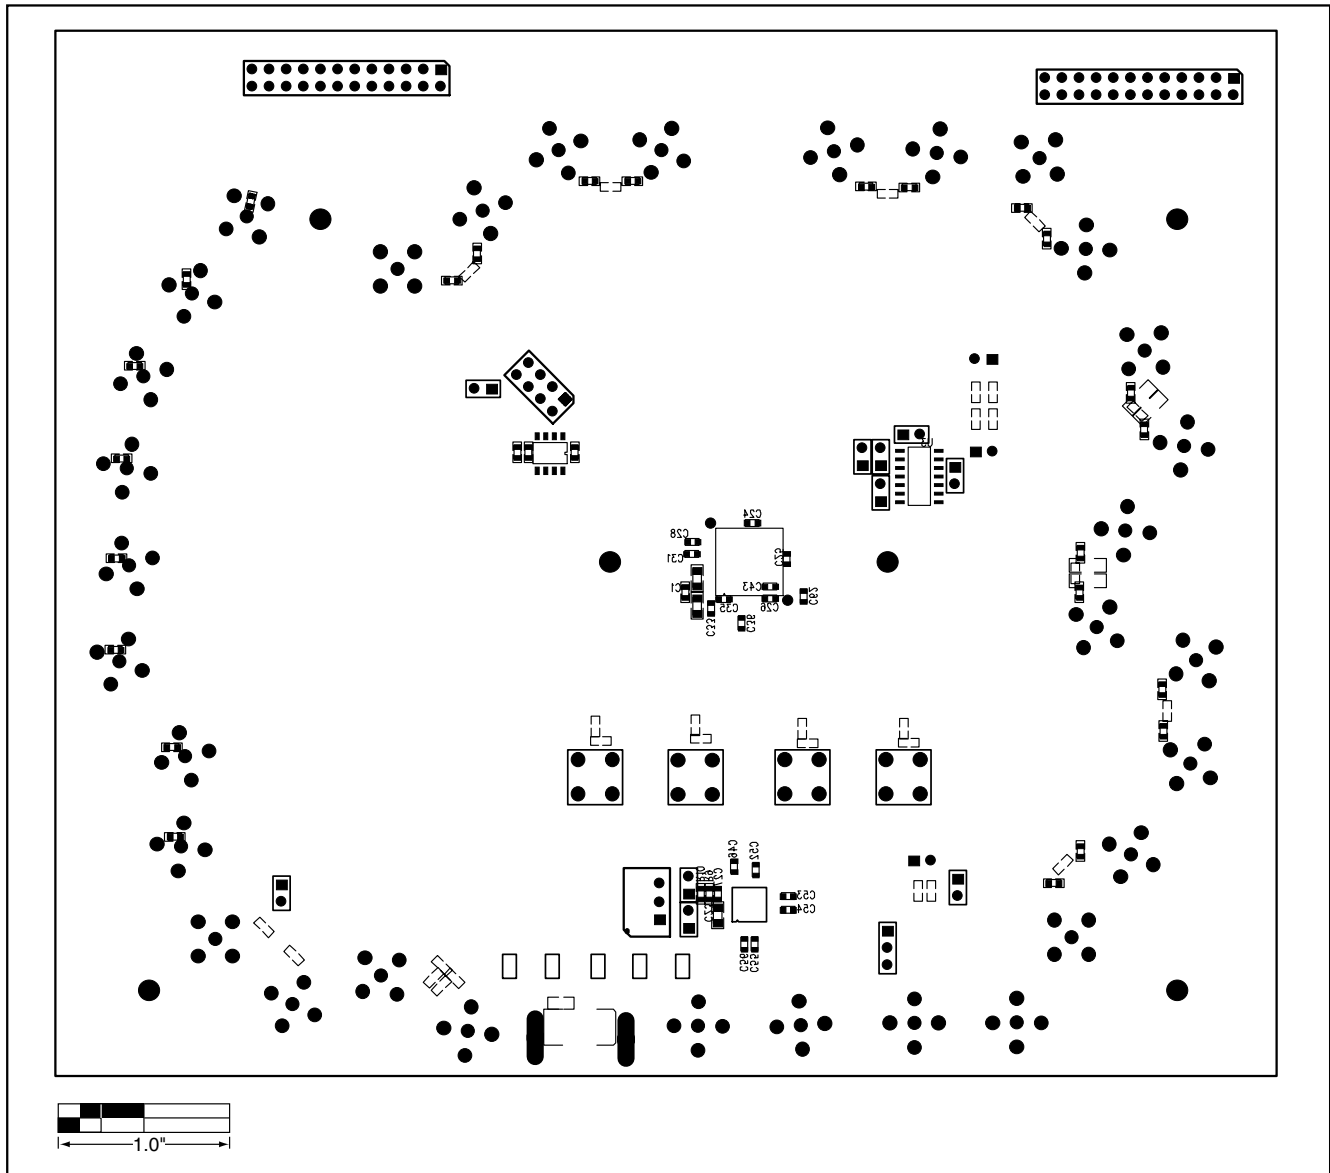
MAX3831/MAX3832 EV Kits Component Placement Guide—Solder Side
